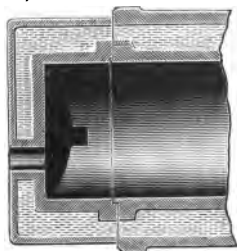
"Stockport" Gas Engine—Section of Cylinder End.
